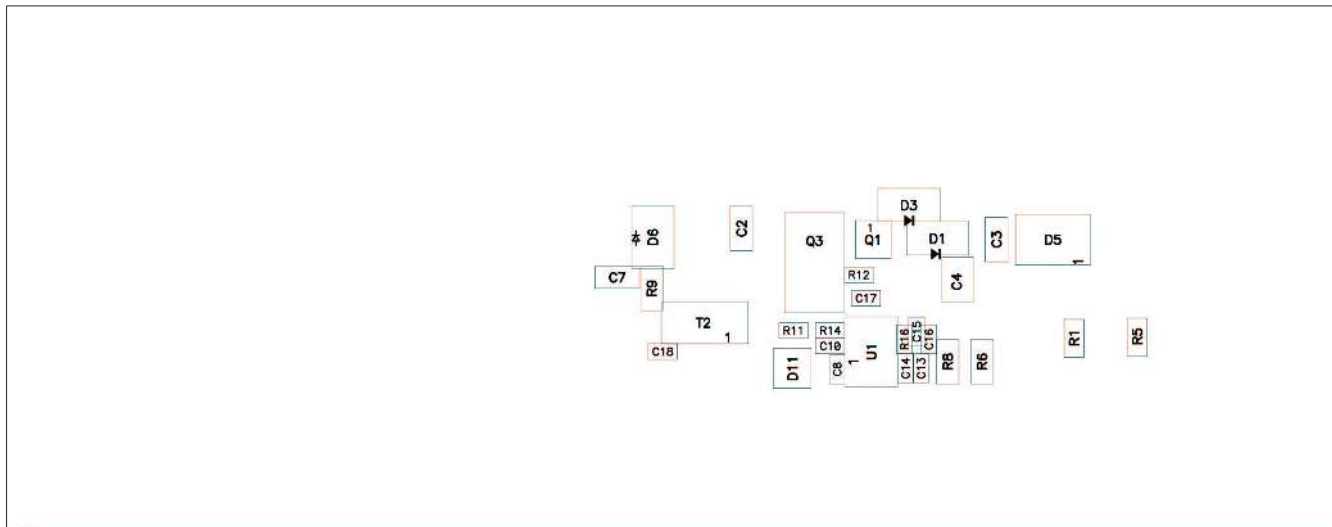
TPS92070EVM-648 Bottom Assembly Drawing (Bottom view)
